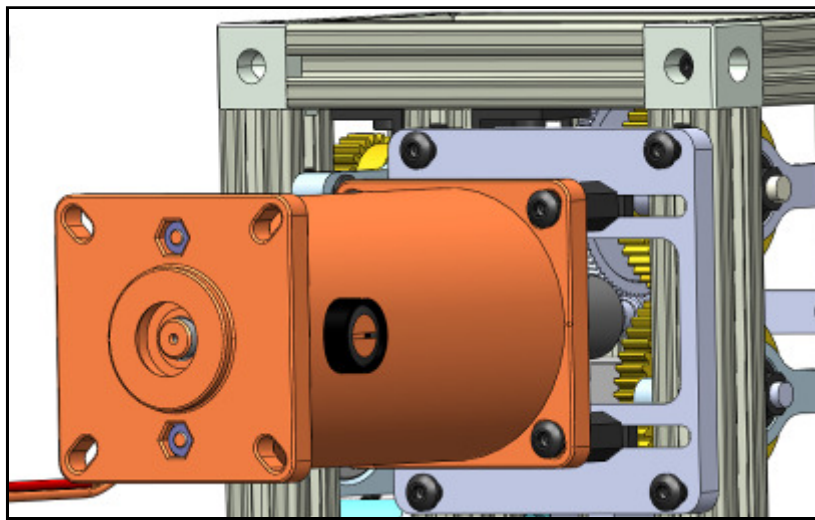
DC motor drive for tightening of the expanding diameter pin
